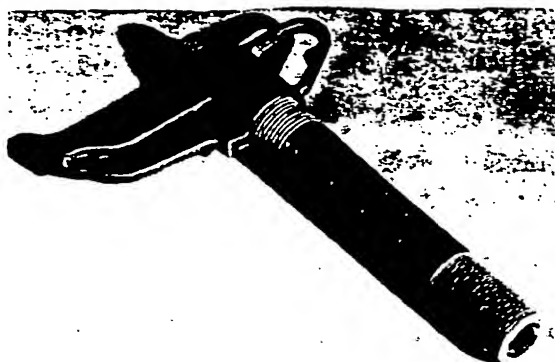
High voltage fuse cutout assembly: machined threaded glass wound $1\frac{1}{8}$ -inch. O.D. tube has static burst pressure of 50,000 psi. (Courtesy of Spaulding Fibre Co., Inc.)
